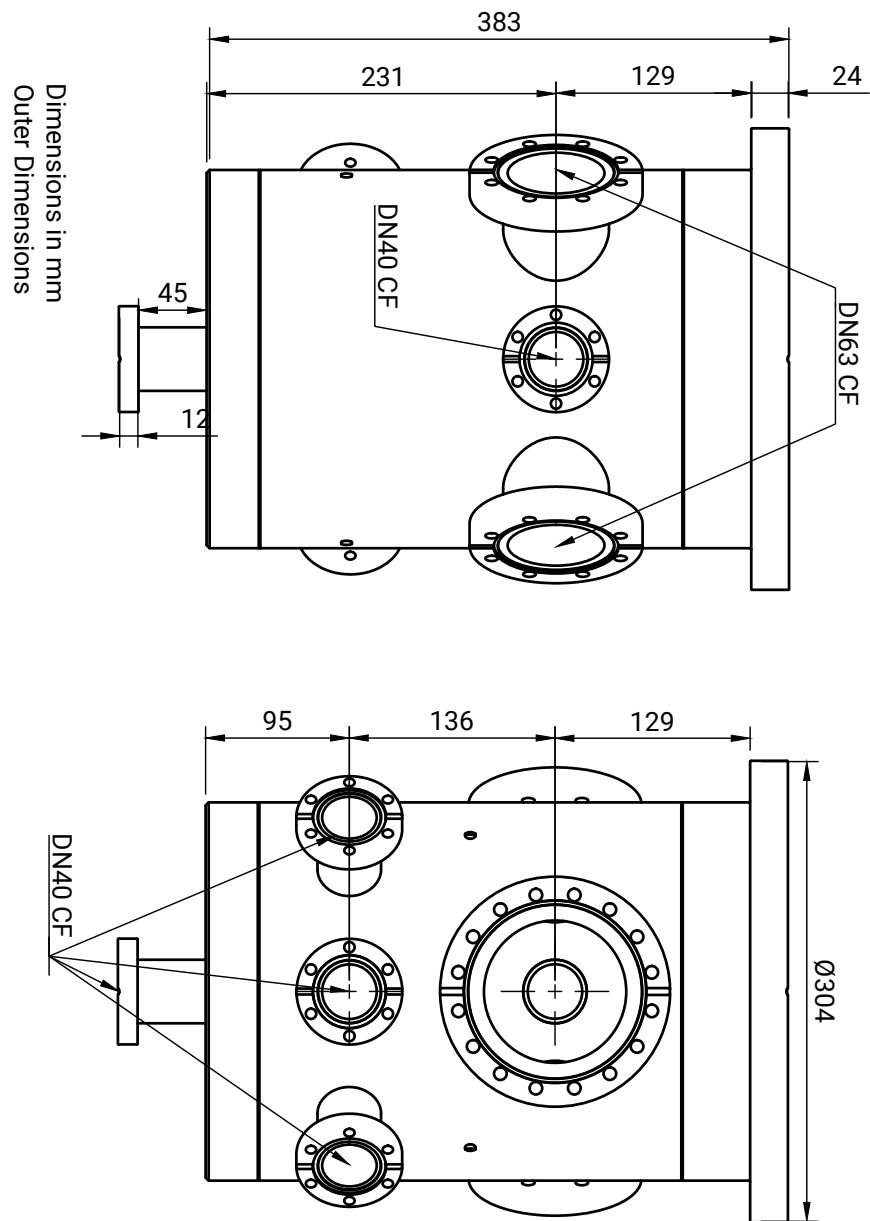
Technical drawing of the lower part of the aluminum vacuum chamber in side view.
